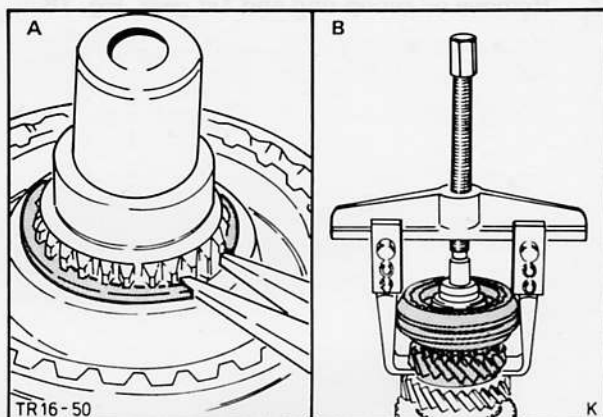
A – Remove circlip of 3rd/4th gear synchroniser hub
